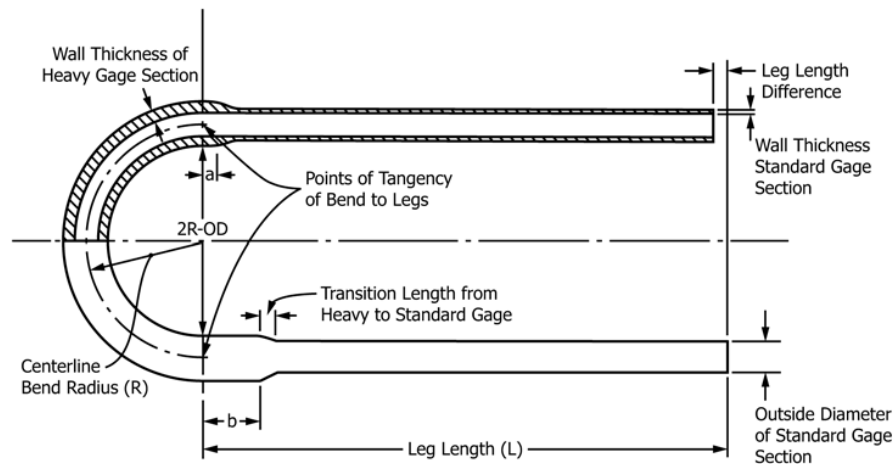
Centering of U-Bend in Heavy Gage Section of Tube
